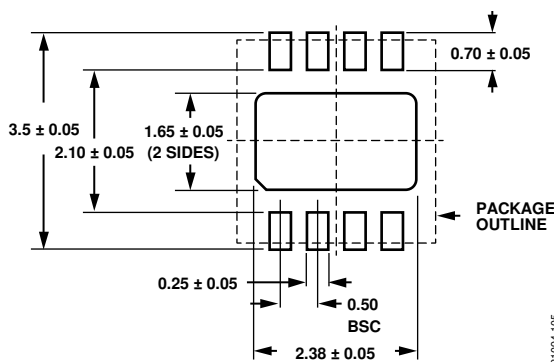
CP-8-29 (8-Lead LFCSP) Recommended Solder Pad Layout, Apply Solder Mask to Areas That Are Not Soldered
